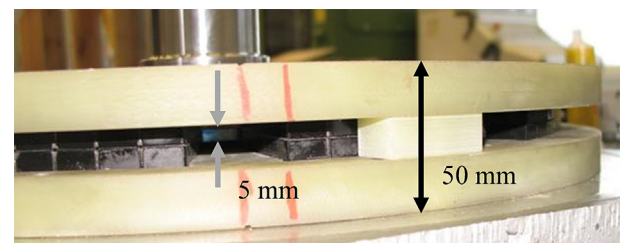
Rotor structure's glass fibre bodywork and permanent magnets after assembly.
